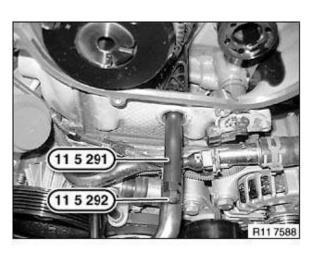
Identifying Special Tools (11 5 291) And (11 5 292) Courtesy of BMW OF NORTH AMERICA, INC.
